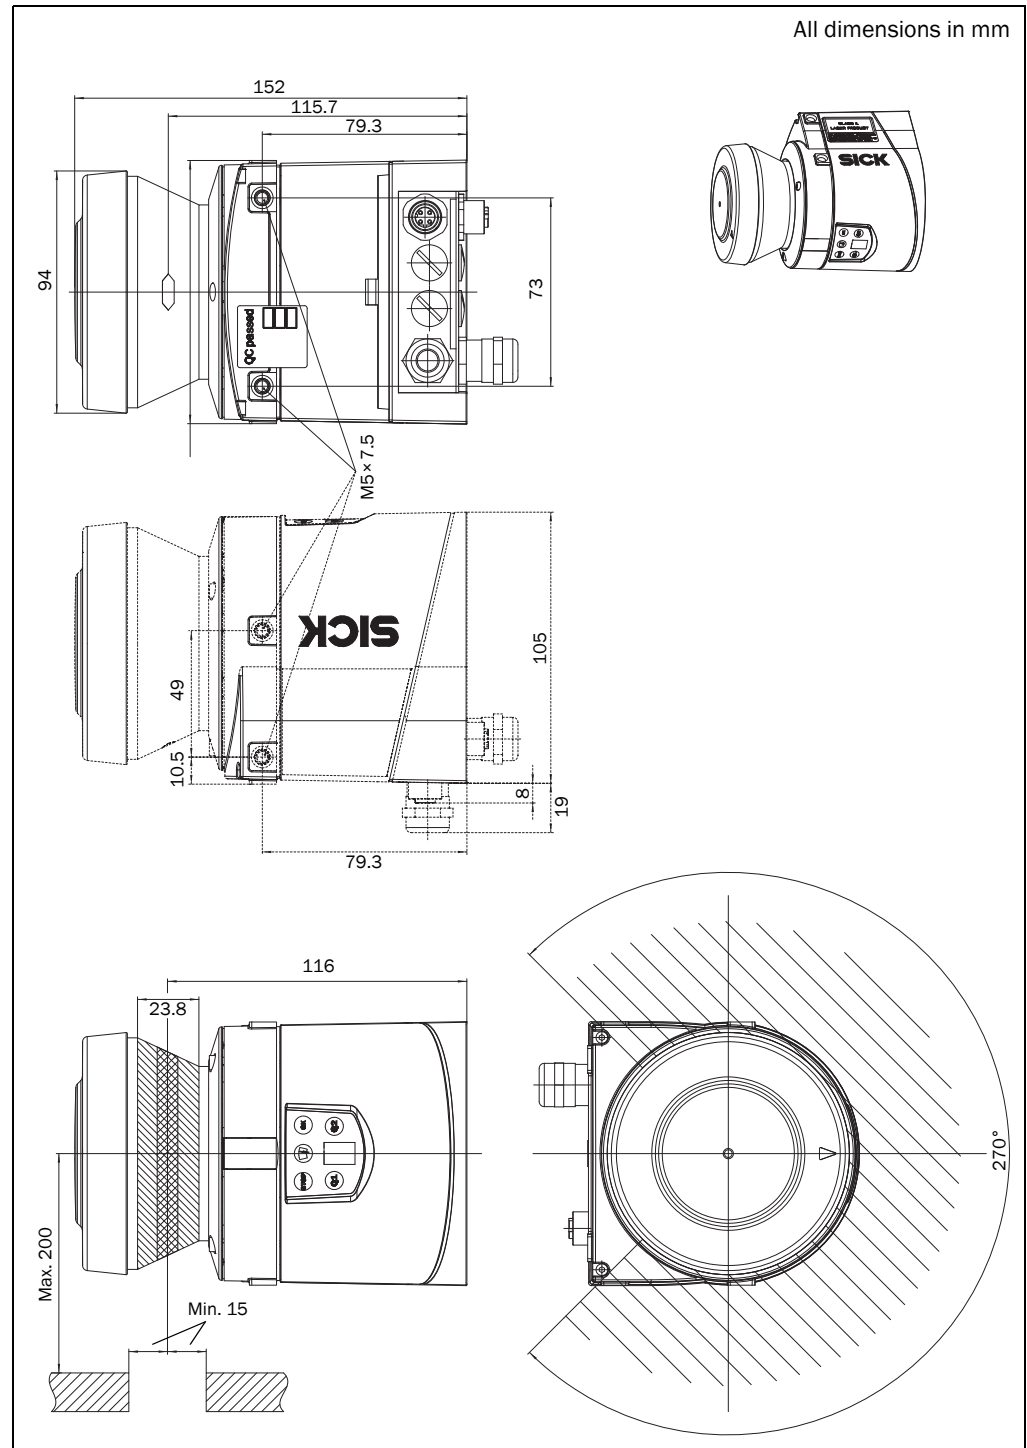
Dimensional drawing LMS12x Security and LMC12x VdS
